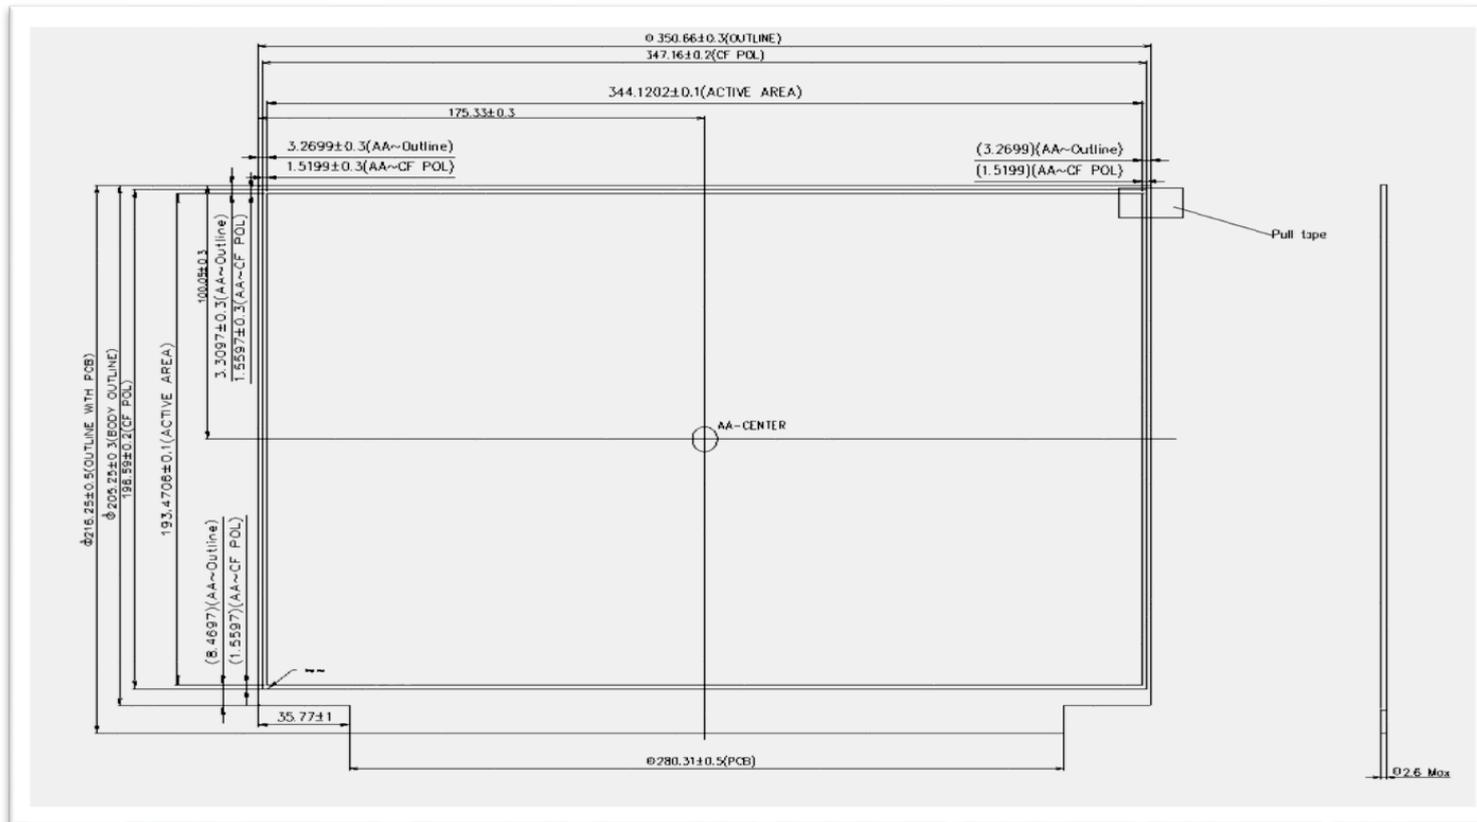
TFT-LCD Module Outline Dimension (Front View)
